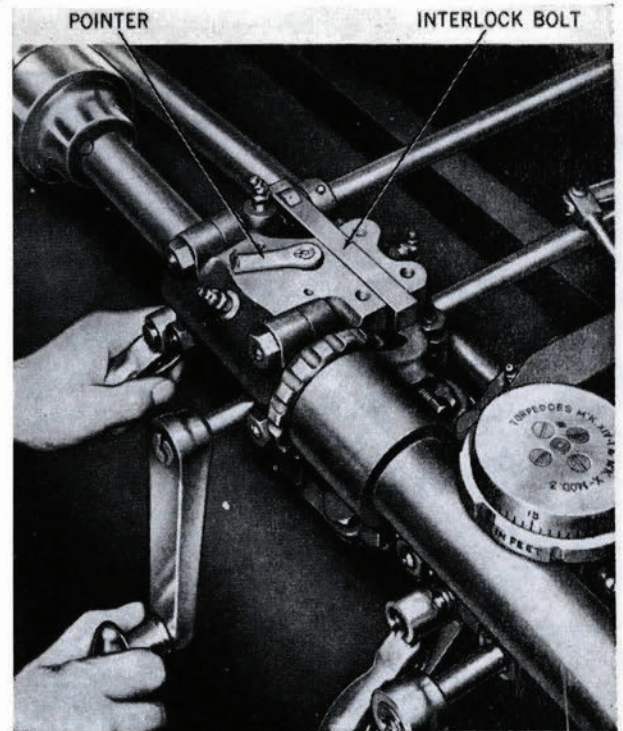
Simple Type Speed Setting Mechanism Installed—Spindle IN—Indicator Plate Removed.
